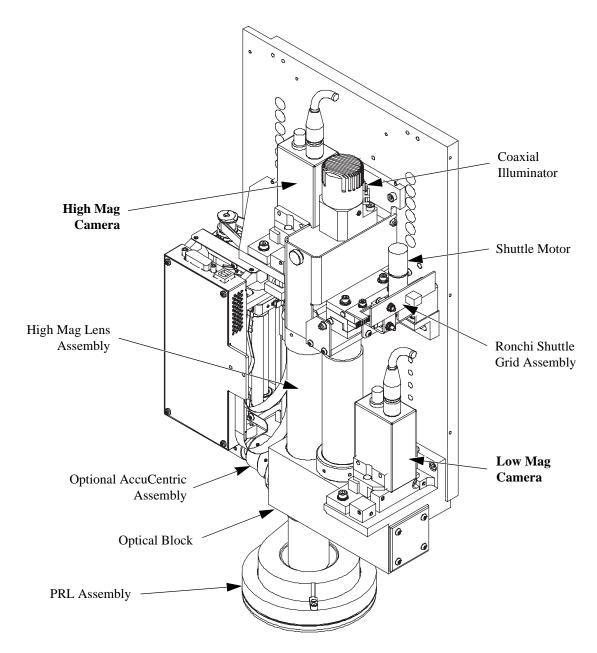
Optical Components (shown with optional Ronchi Shuttle grid assembly)
